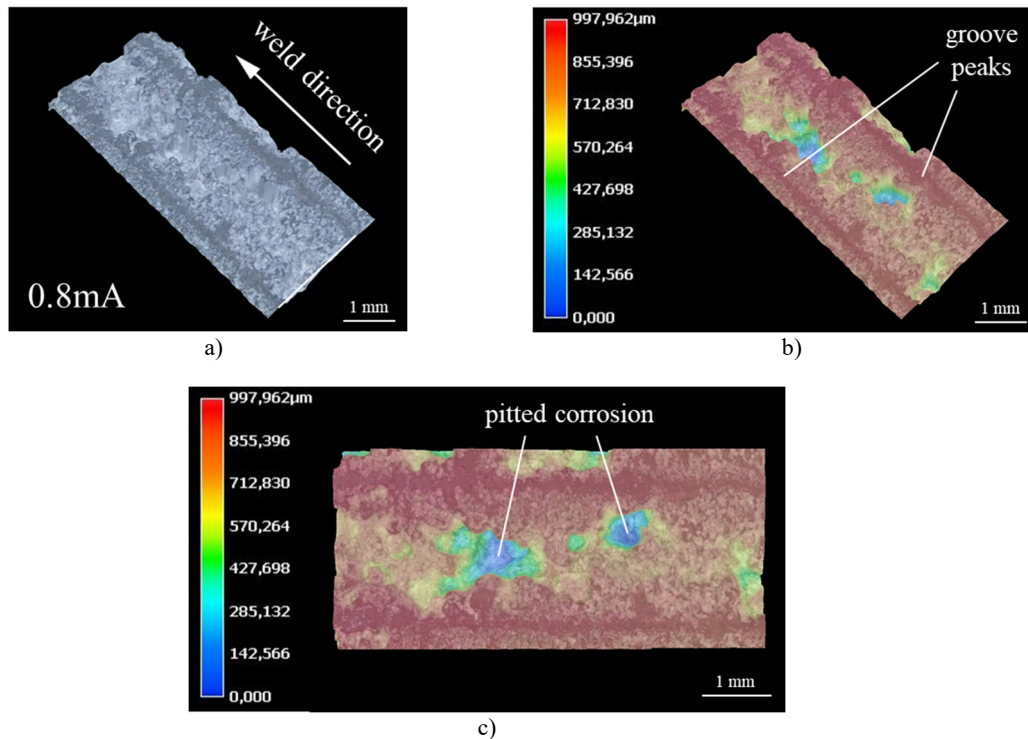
EB-structured (0.8mA) – Topography of corroded and cleaned sample a) weld direction b) groove peaks c) pitted corrosion (top-view)
